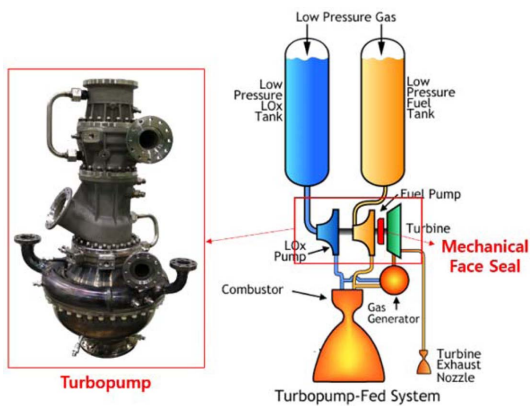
Configuration of 7-ton class turbopump and layout of turbopump type rocket engine.
